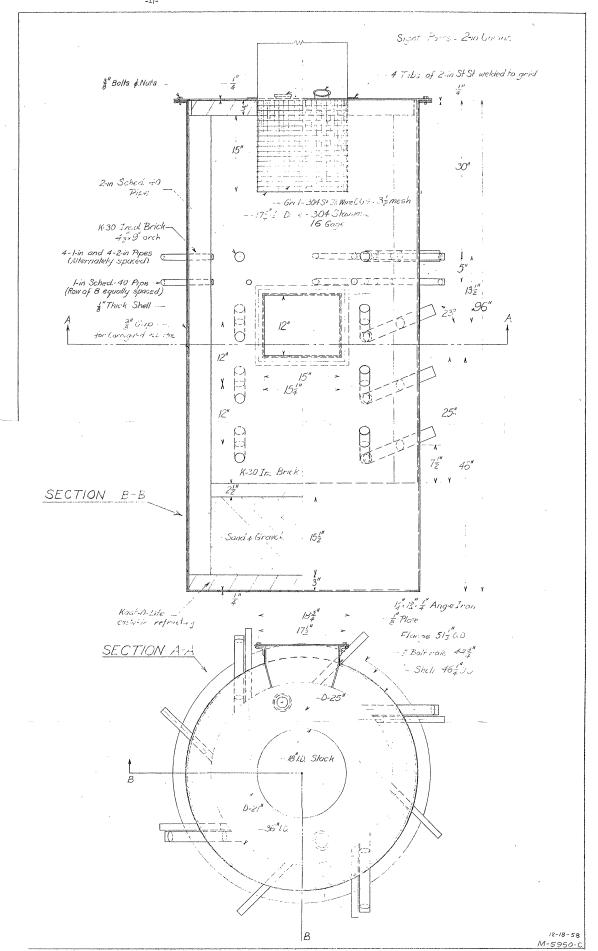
CROSS-SECTIONAL VIEW OF MODIFIED EXPERIMENTAL INCINERATOR SECRET
